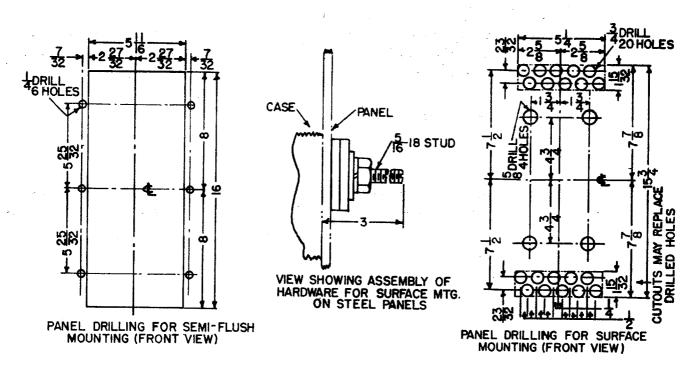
Outline and Panel Drilling Dimensions for Type IBC52A(-)YI Relay
